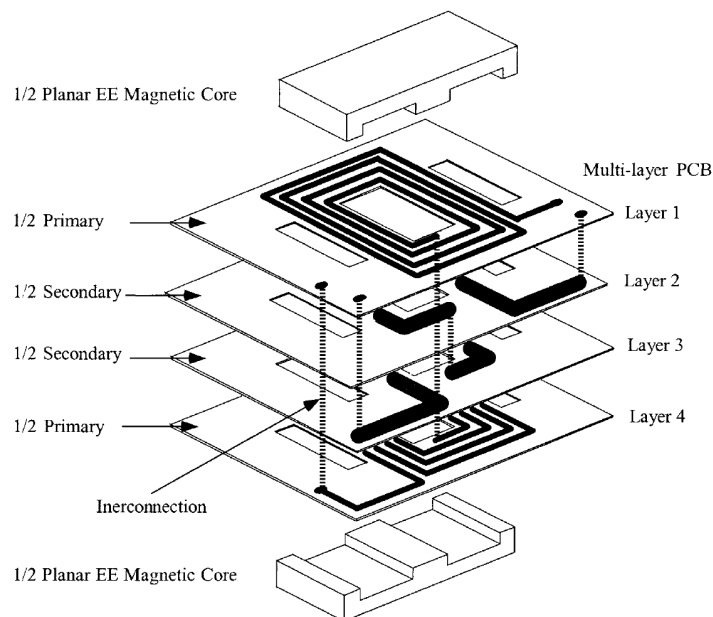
Exploded view of a planar transformer built from a multi-layer PCB [71]
